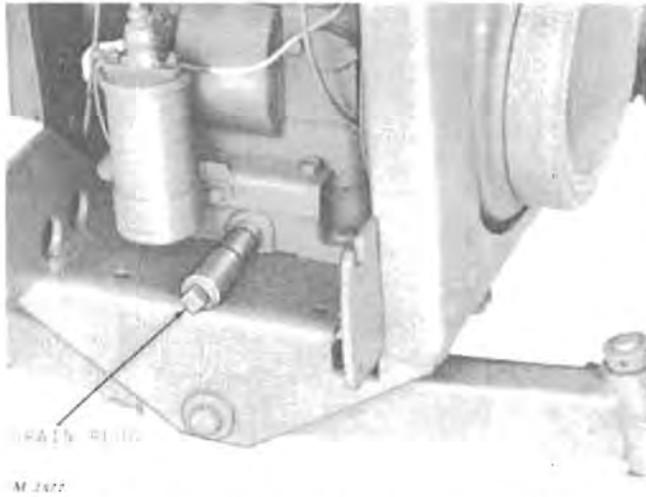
Oil Drain on 110 Tractors (-15000)
